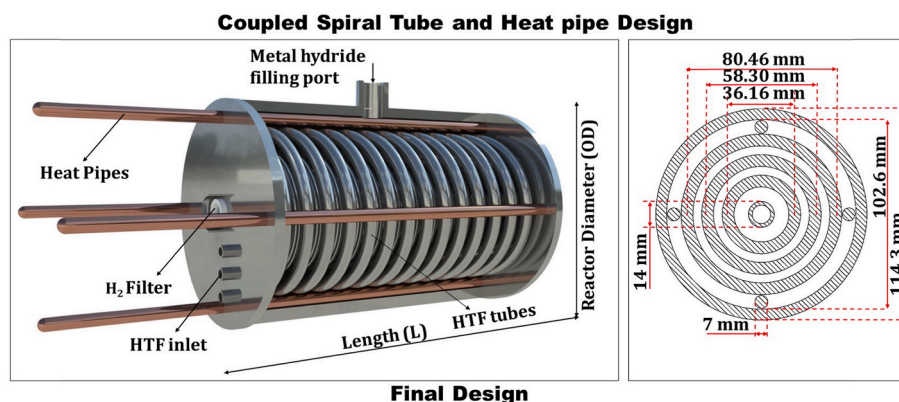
Pictorial and cross-sectional view of coupled spiral tube and heat pipe design.
